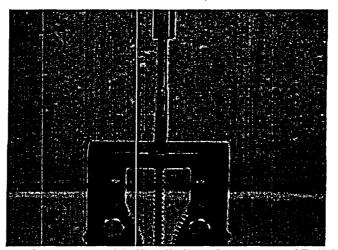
Source Assembly Tensile Test Connector and Ball Setup
